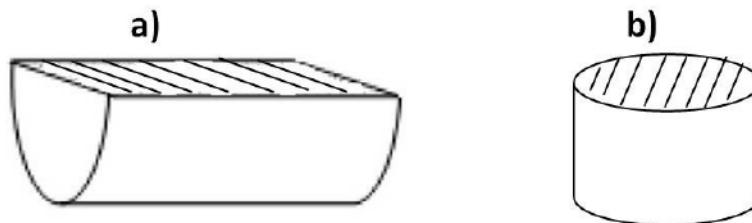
a) Longitudinal section performed in the middle of the sample (parallel to the drawing direction); b) Transverse section performed perpendicular to wire axis
